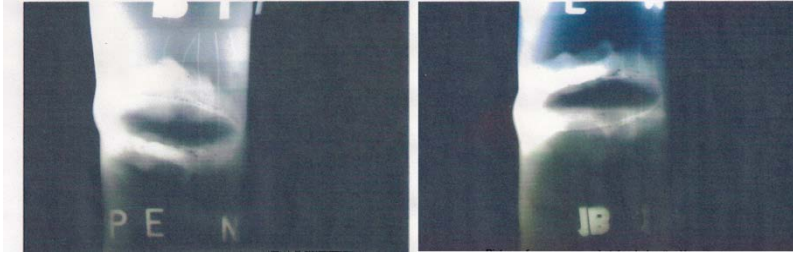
Image of X-ray test of welded copper pipe
